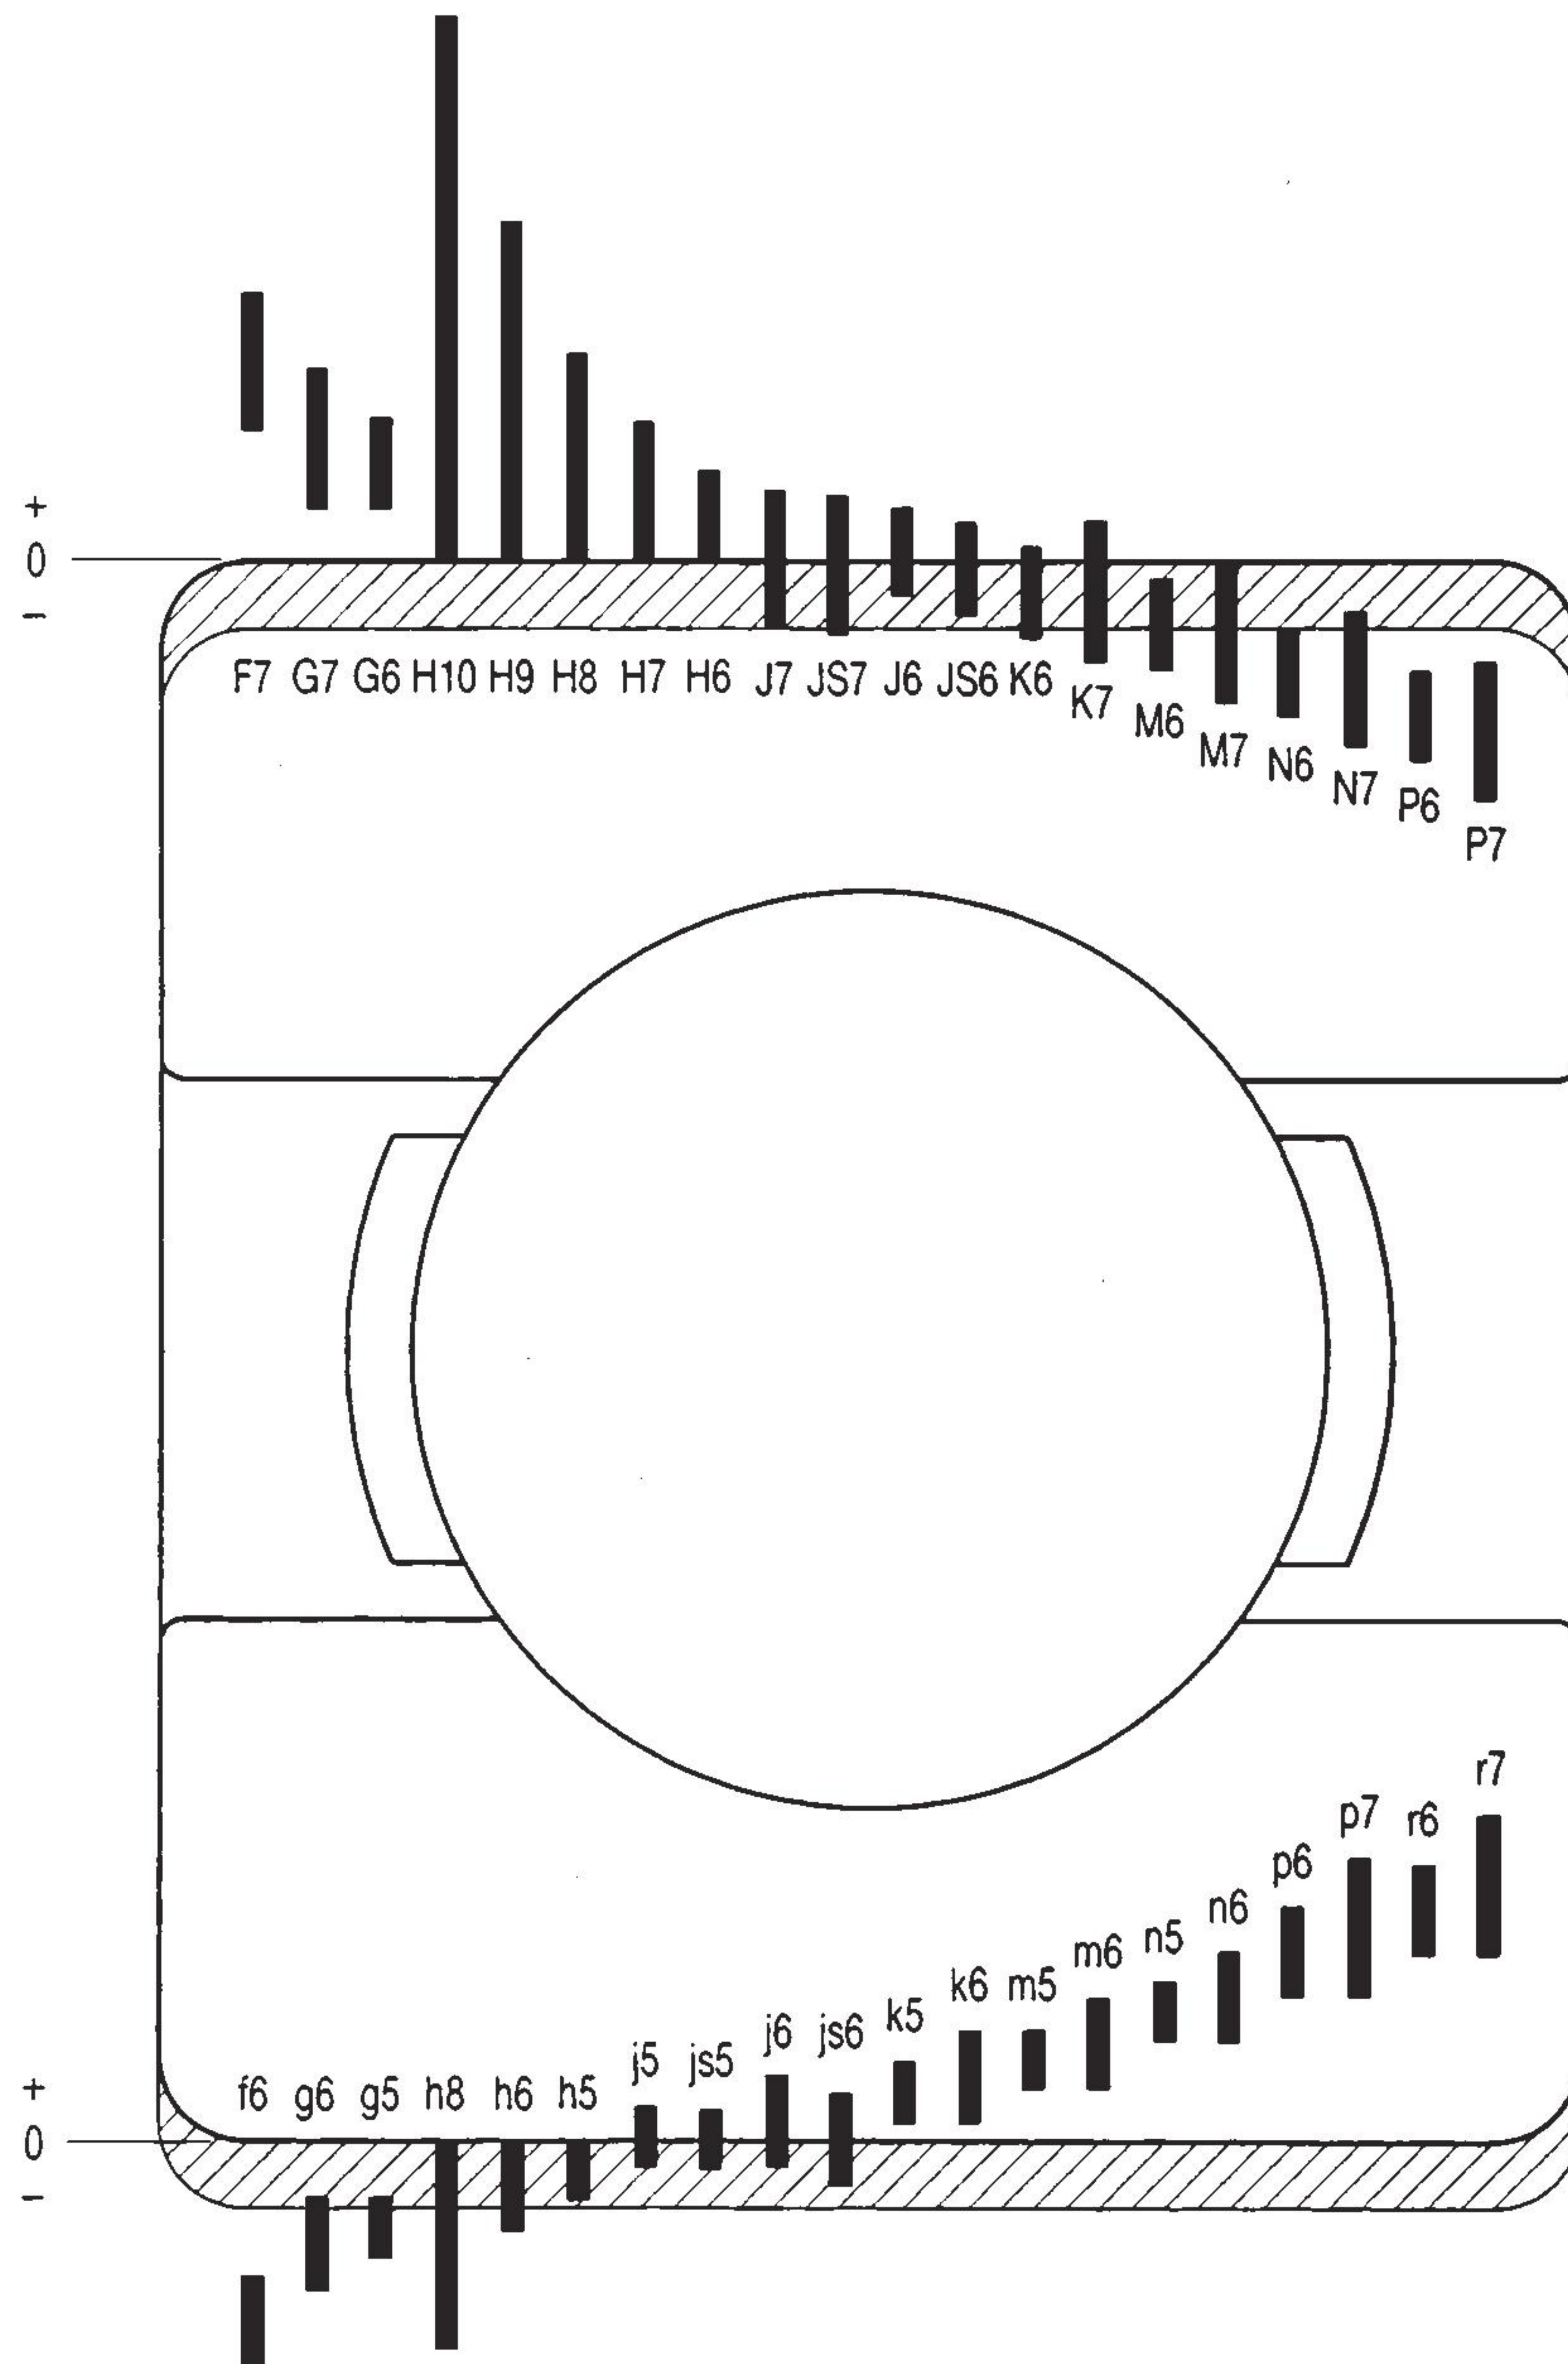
ISO fit tolerances. Uppercase letters refer to housings; lowercase letters refer to shafts.
